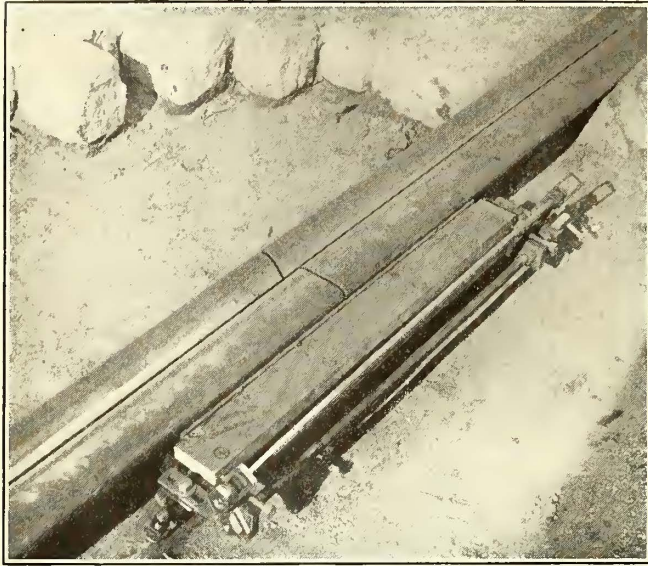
APPARATUS FOR ARC WELDING OF JOINTS
